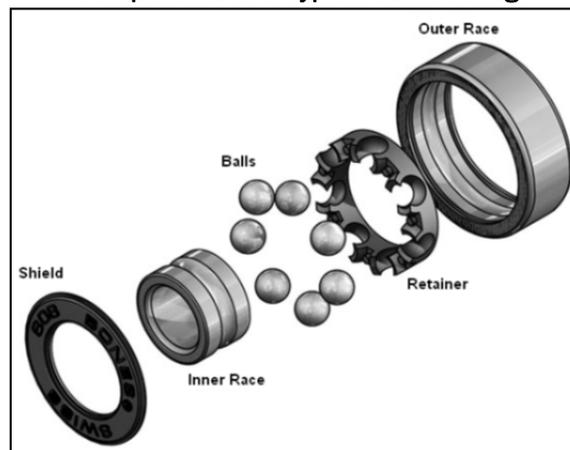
A picture presenting schematic of a ball rolling bearing assembly [WS20]
